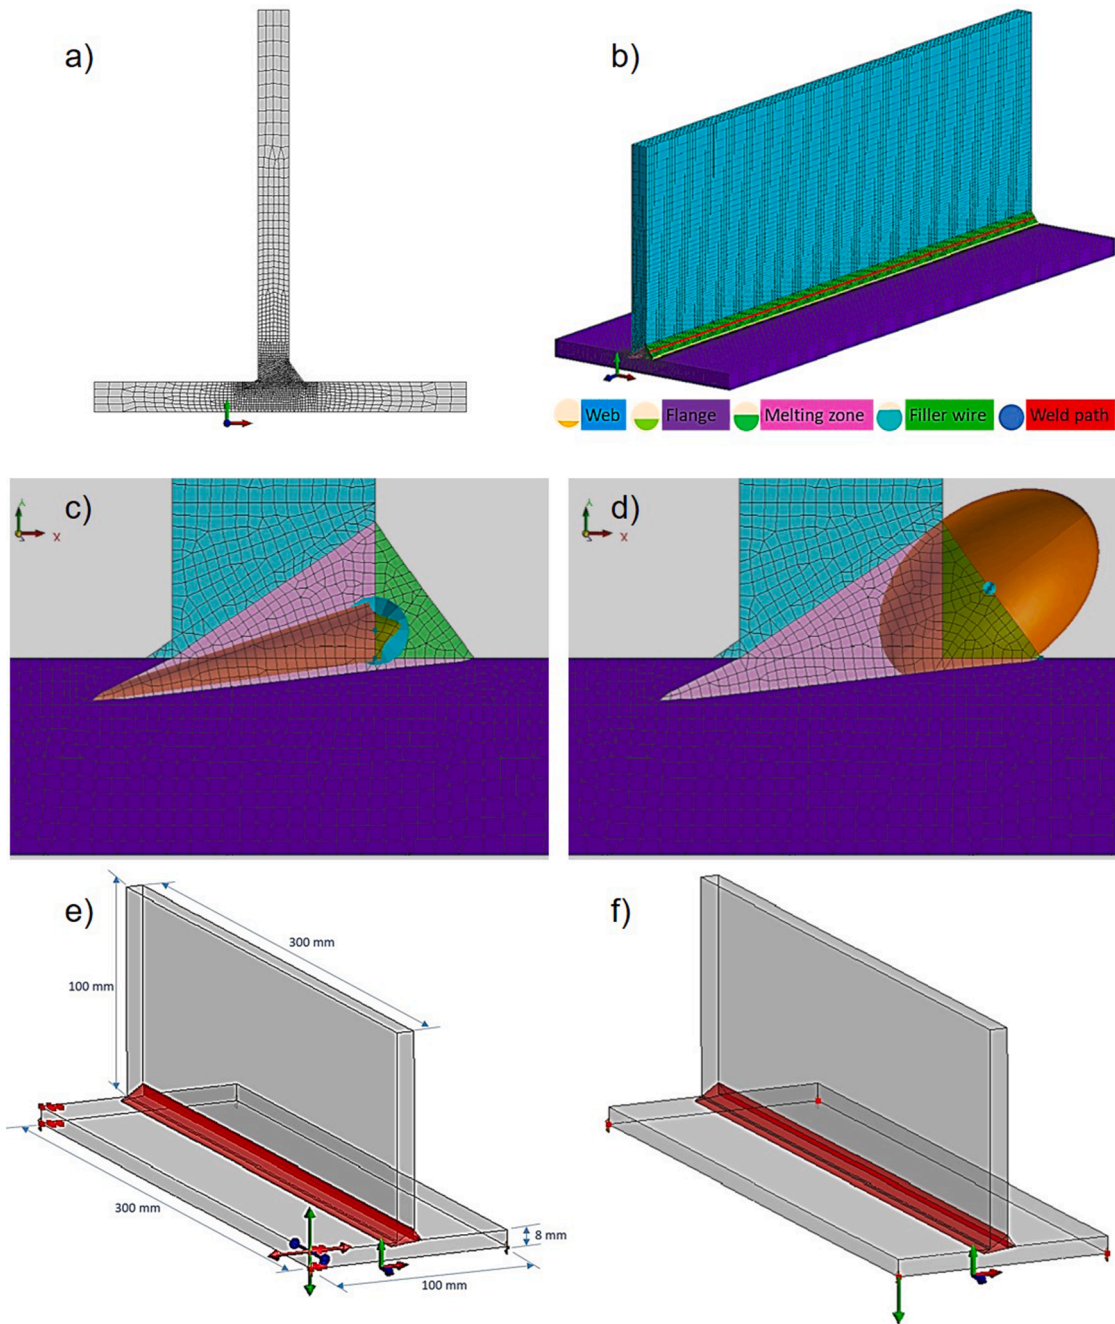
Details of the FEM model: a) 2D mesh; b) 3D mesh; c) 2D section of Laser heat source; d) 2D section of GMA heat source; e) Welding clamps; and f) Supports after welding.
